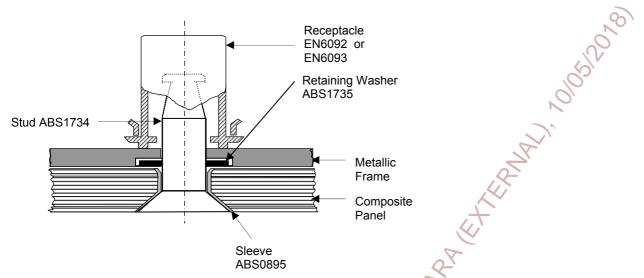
Example of final assembly – 2 - start tapered quick release system (composite panels with acres sleeves)
